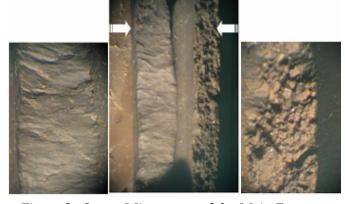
Stereo Microscopy of the Main Fracture Surface
